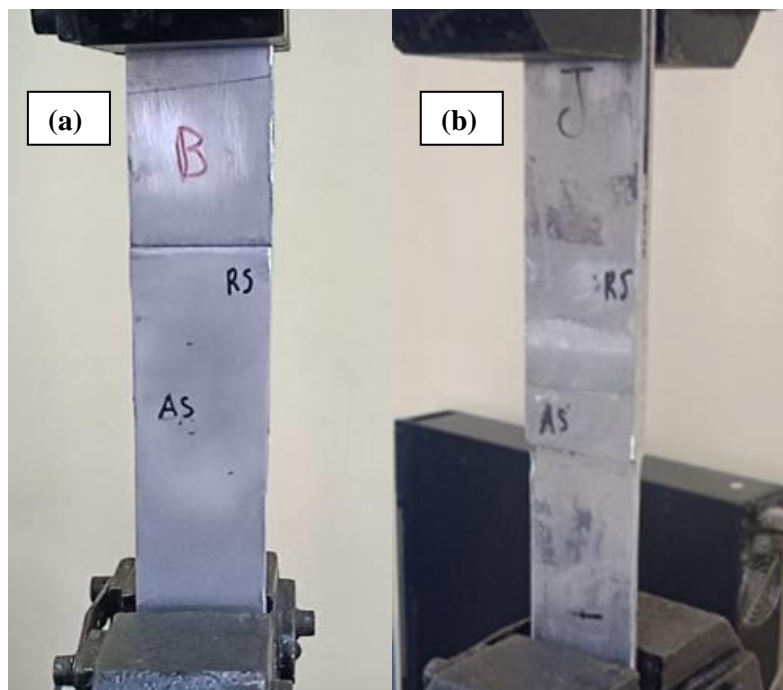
Overlap shear fracture testing configurations, a) single lap, b) double lap.
